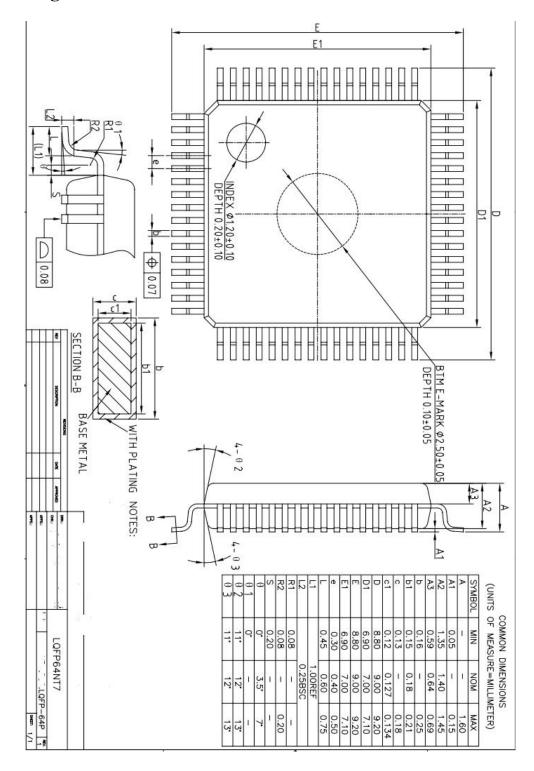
LQFP64-7x7mm Package Dimension Parameter
